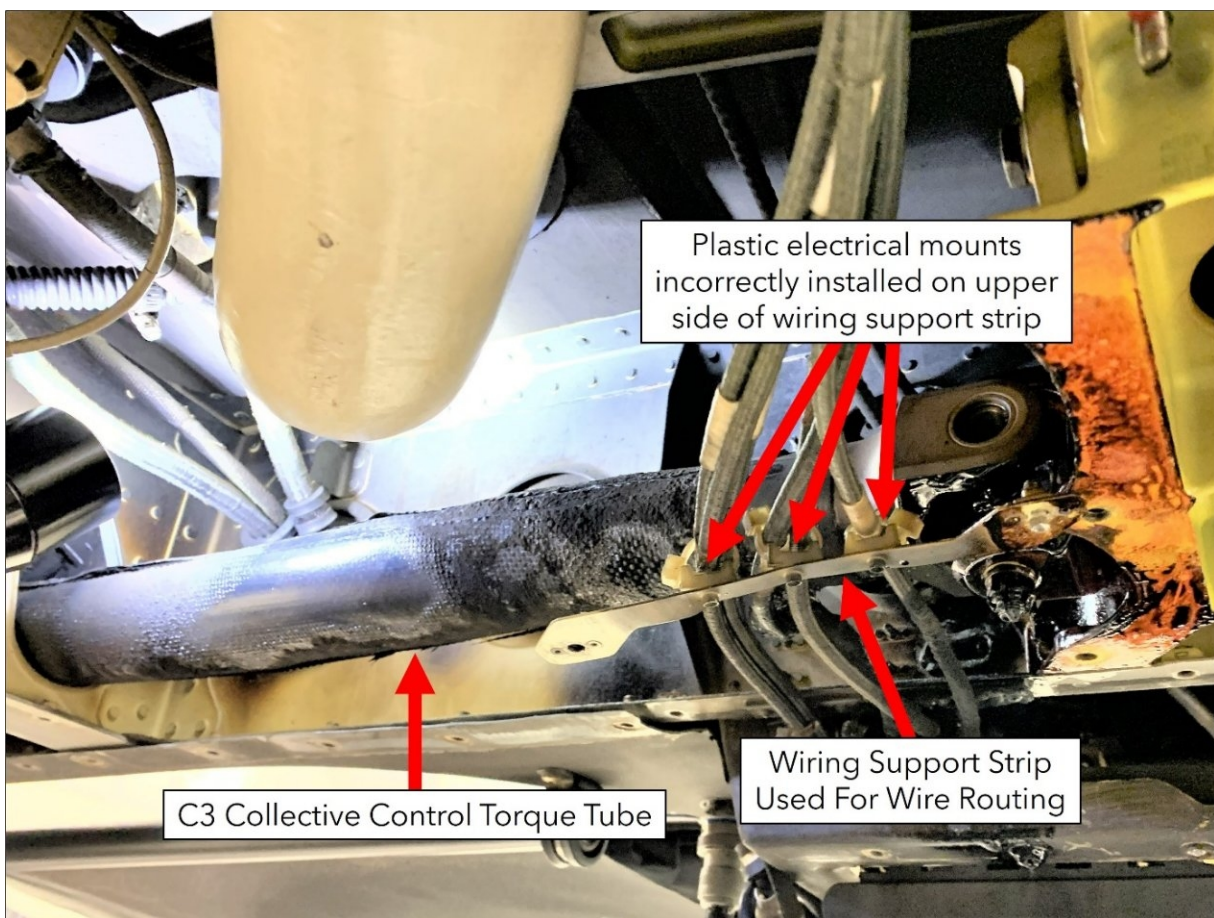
C3 collective torque tube and wiring support strip used for wire routing
